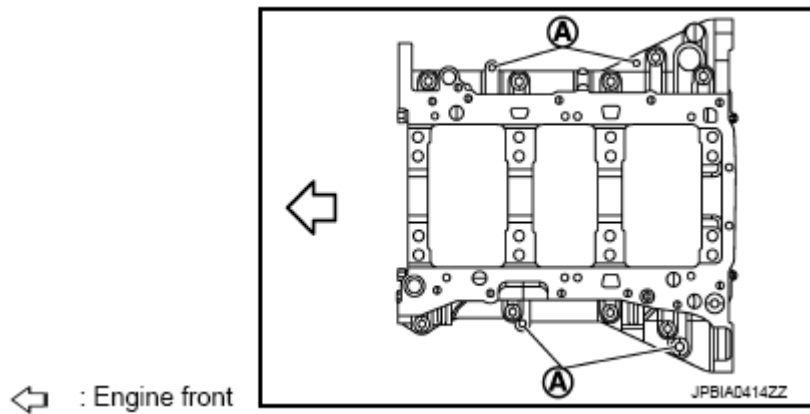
Locating Lower Cylinder Block Bolt Holes
